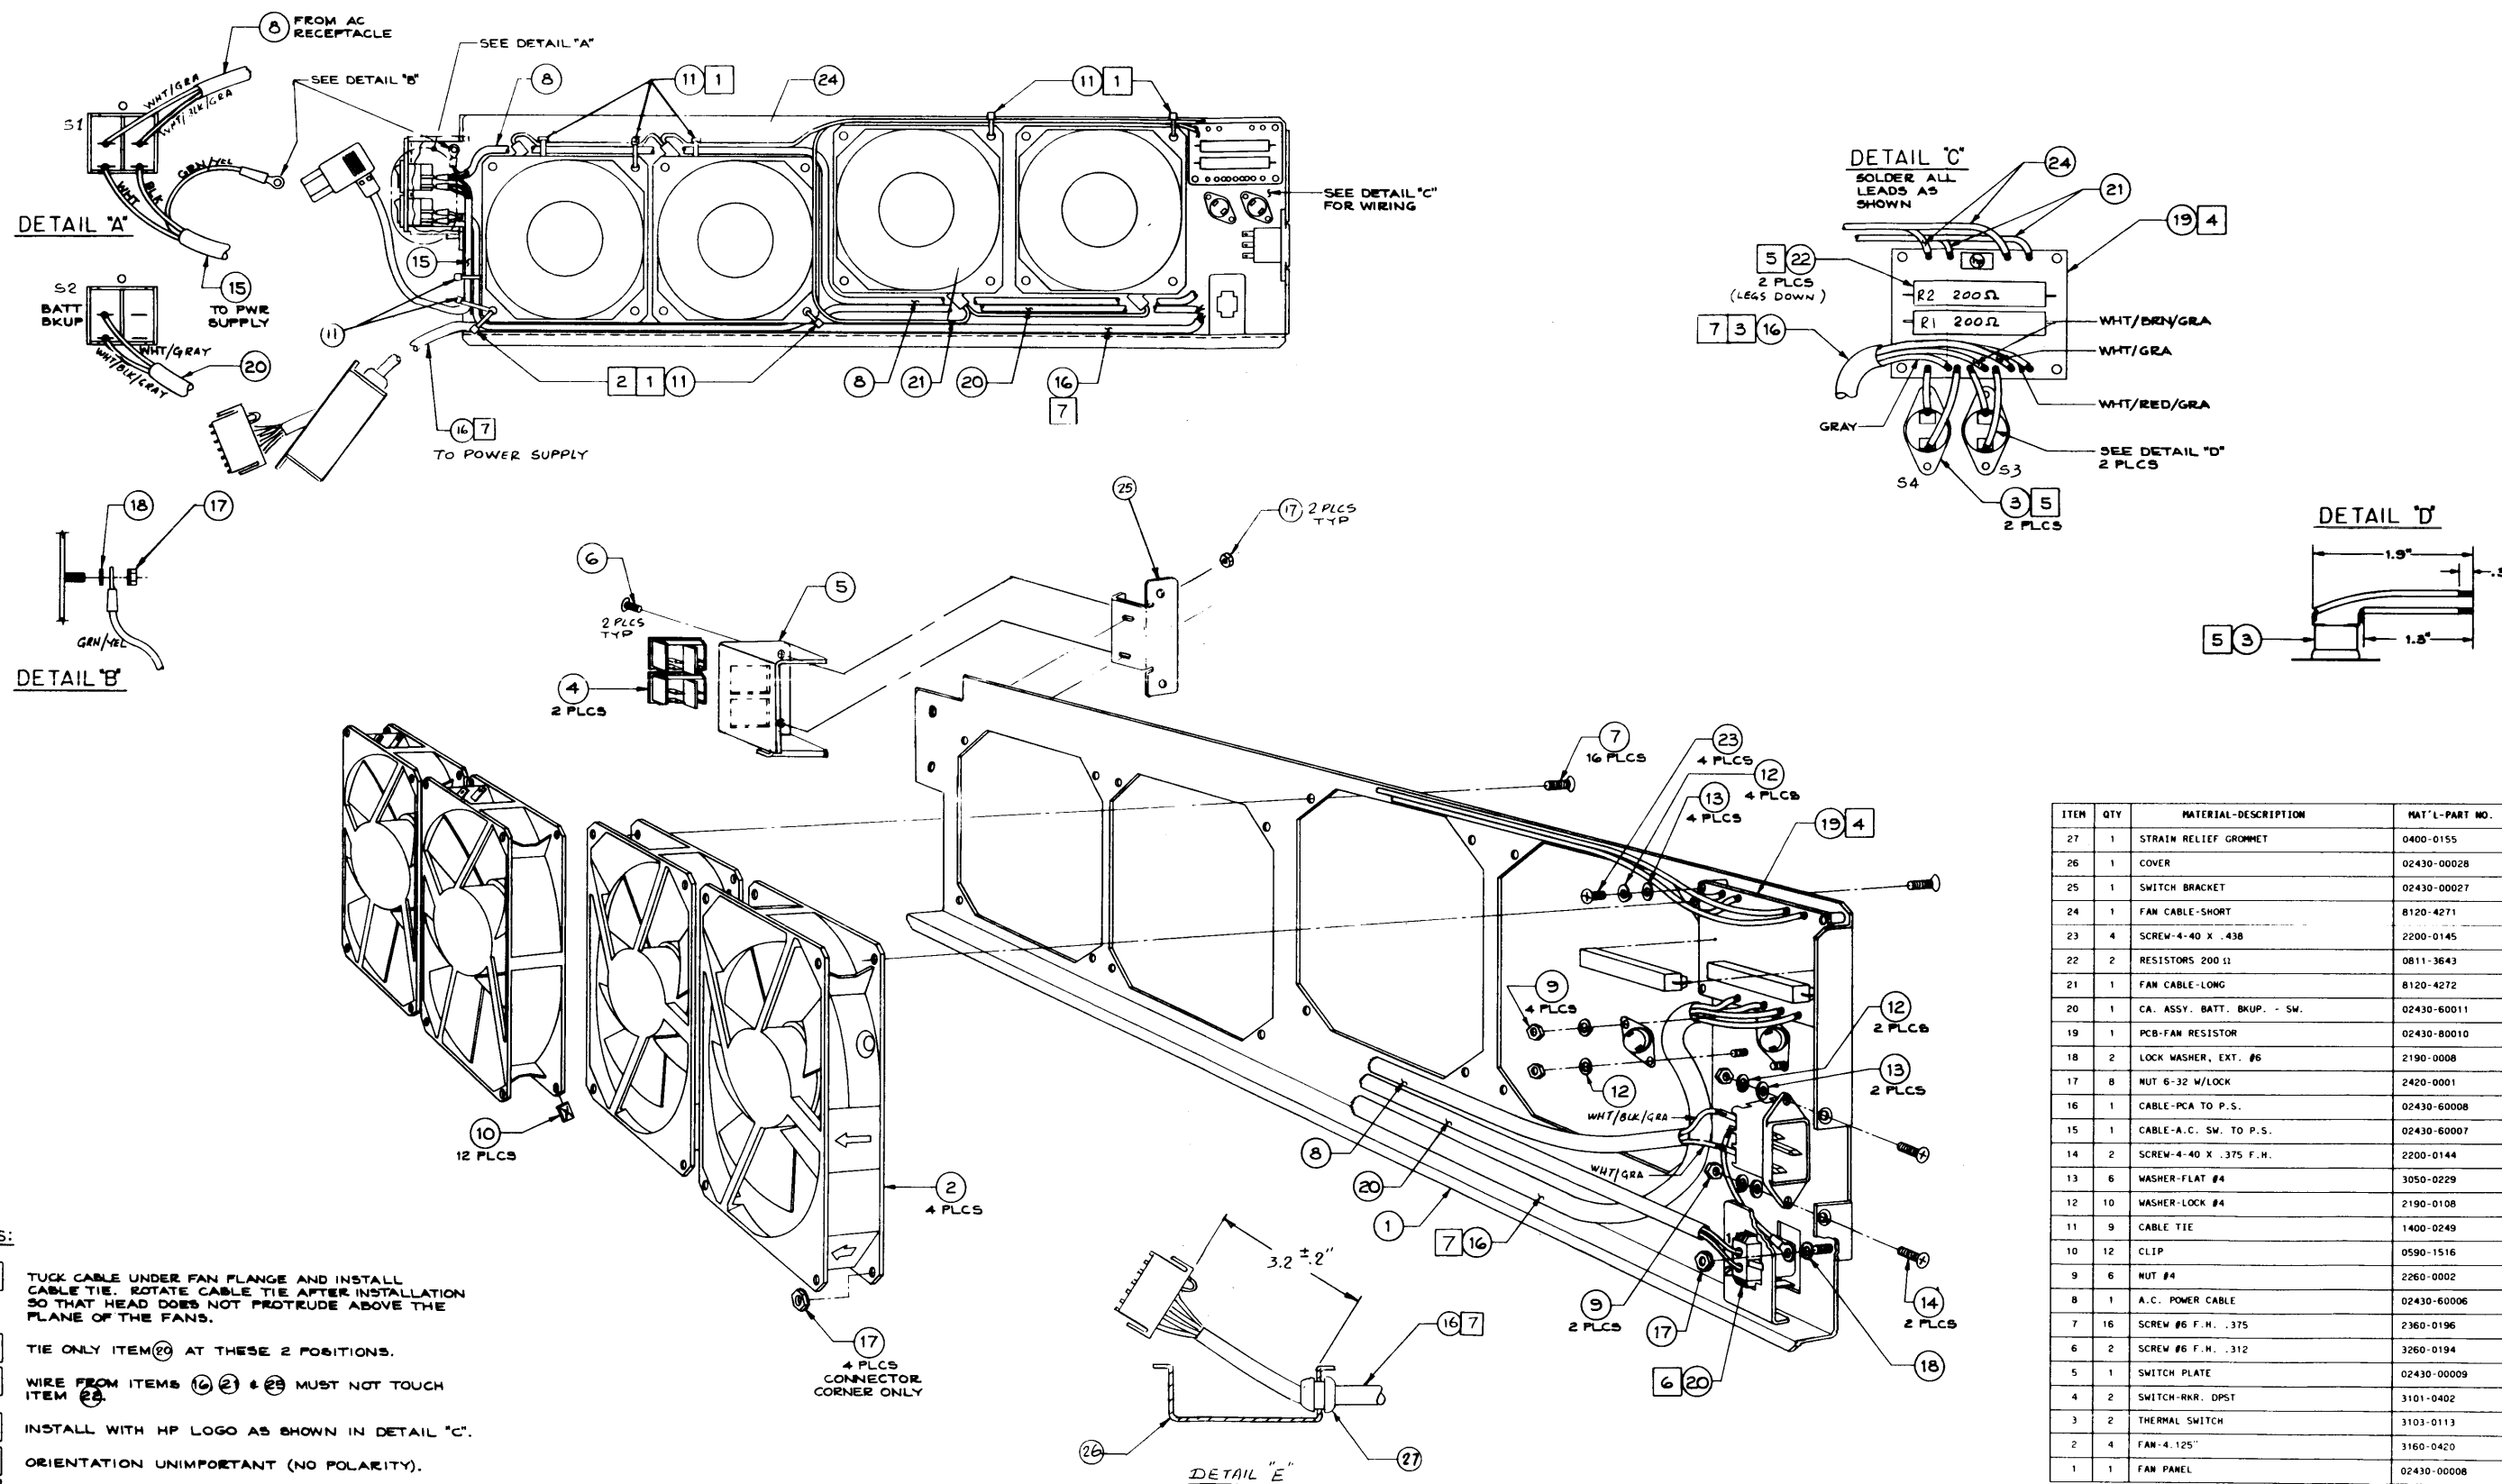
Rack Mounted 16-Slot Box Assembly (Sheet 3 of 4)
